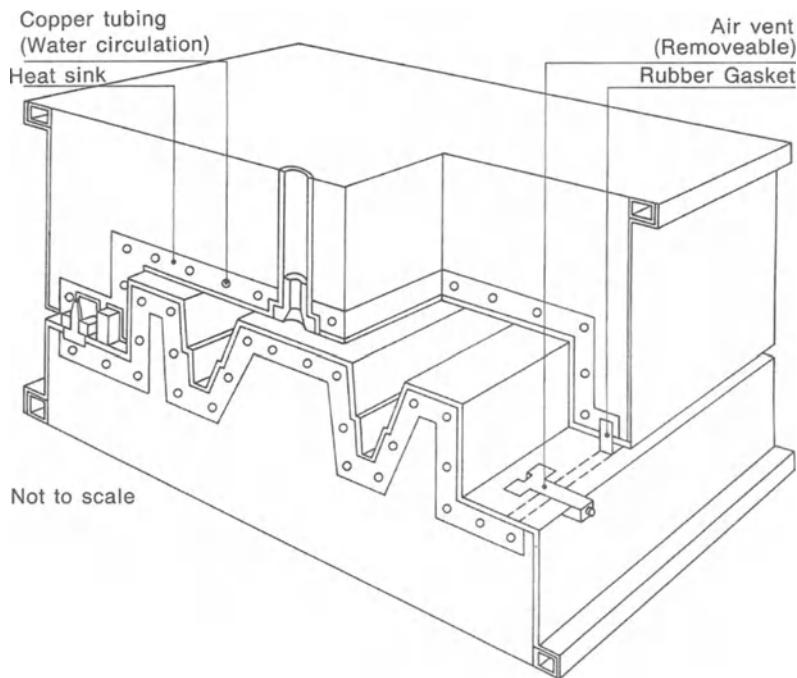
Cross-section view of a mold used in resin transfer molding. Reinforcement is placed in the cavity, the mold is closed, and plastic liquid under low pressure of about 50 psi enters the cavity through the opening on the top of the mold (7).
